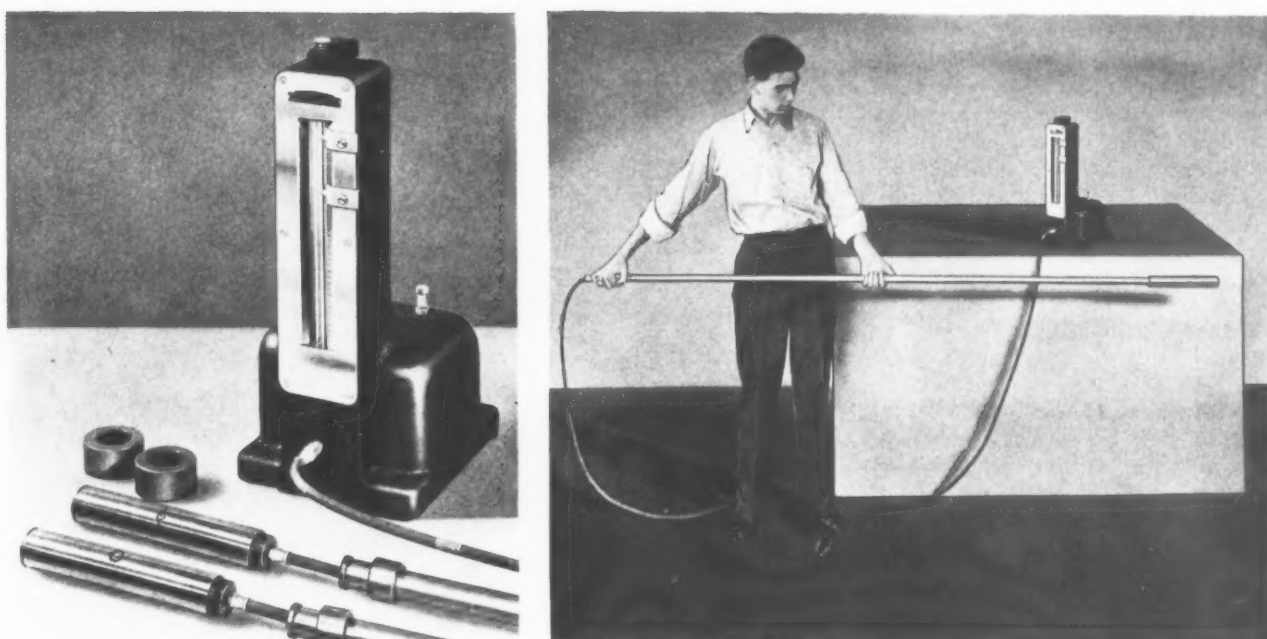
(Left) "Precisionaire" Gun-bore Gage, Gaging Noses, and Minimum and Maximum Diameter Master Rings Used in Setting Tolerance Markers on Gage. Fig. 2. (Right) "Precisionaire" Equipment for Checking Gun Bore
